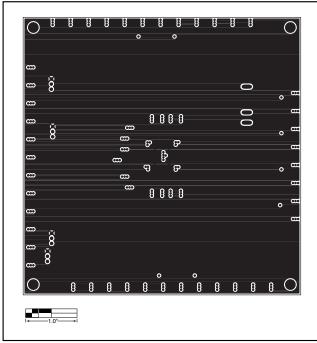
MAX9400 EV Kit PC Board Layout—Inner Layer 3 (VCC Layer)
